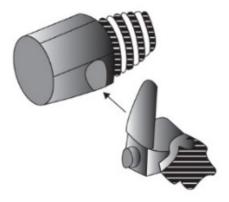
Fixing the SS ball valve to the port of 3-way connector
